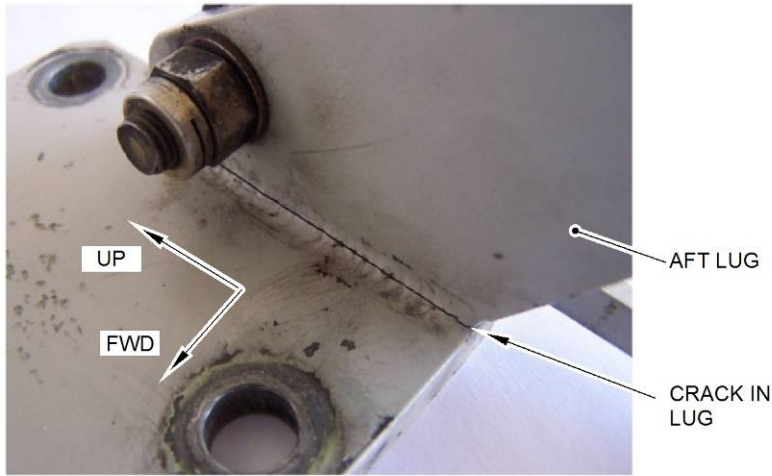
FIRST AFFECTED AIRCRAFTS BRACKET
